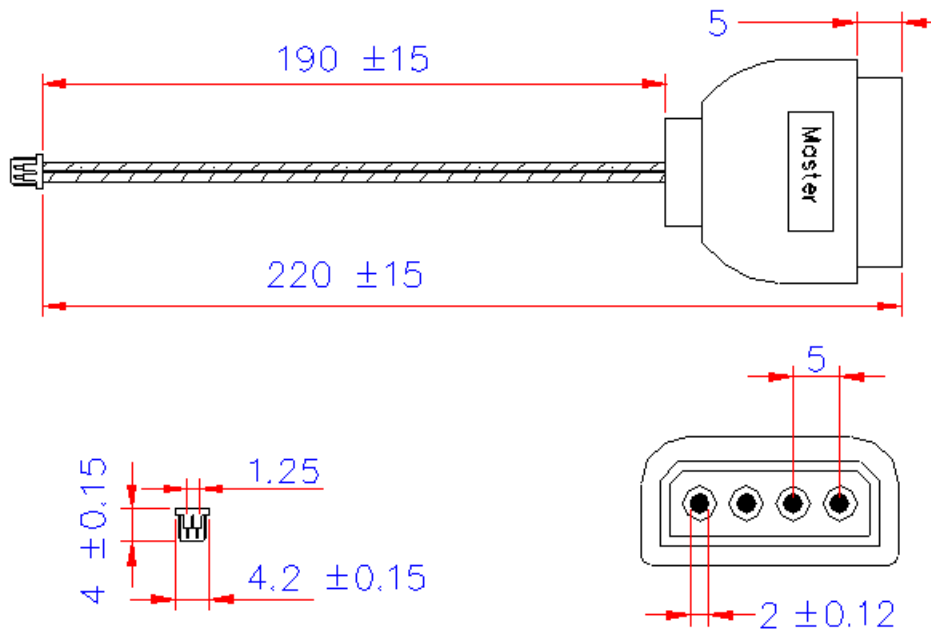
DMV340 Series Cable Physical Outline and Dimensions
